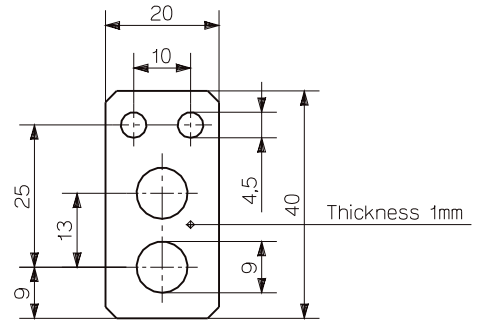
Mounting plate (Art. No. 3.520.1015)
